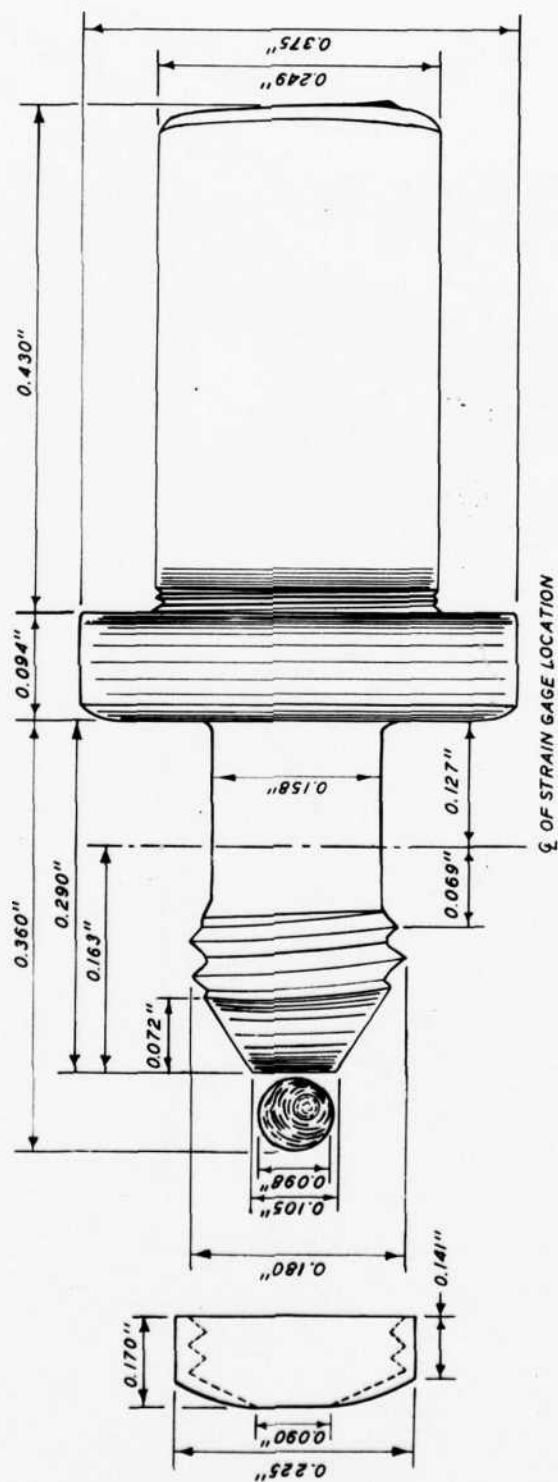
Sleeve, ball, and load sensor. Dimensions are in inches.
